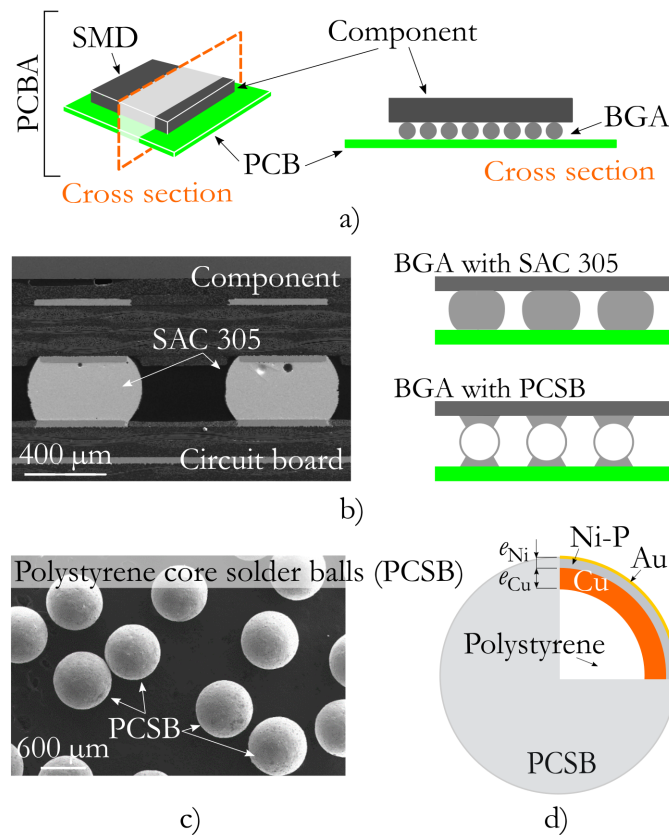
a) Illustration of the Surface Mounted Device (SMD) with a BGA connection in a printed circuit board (PCB), b) Scanning Electron Microscope (SEM) image showing the details of the BGA with SAC305 and illustration of a PCSB mounted with the solder paste to the component and the PCB, c) polystyrene core solder balls (PCSB) of 750 μm in diameter, d) an schematic figure of the structure of a PCSB.
